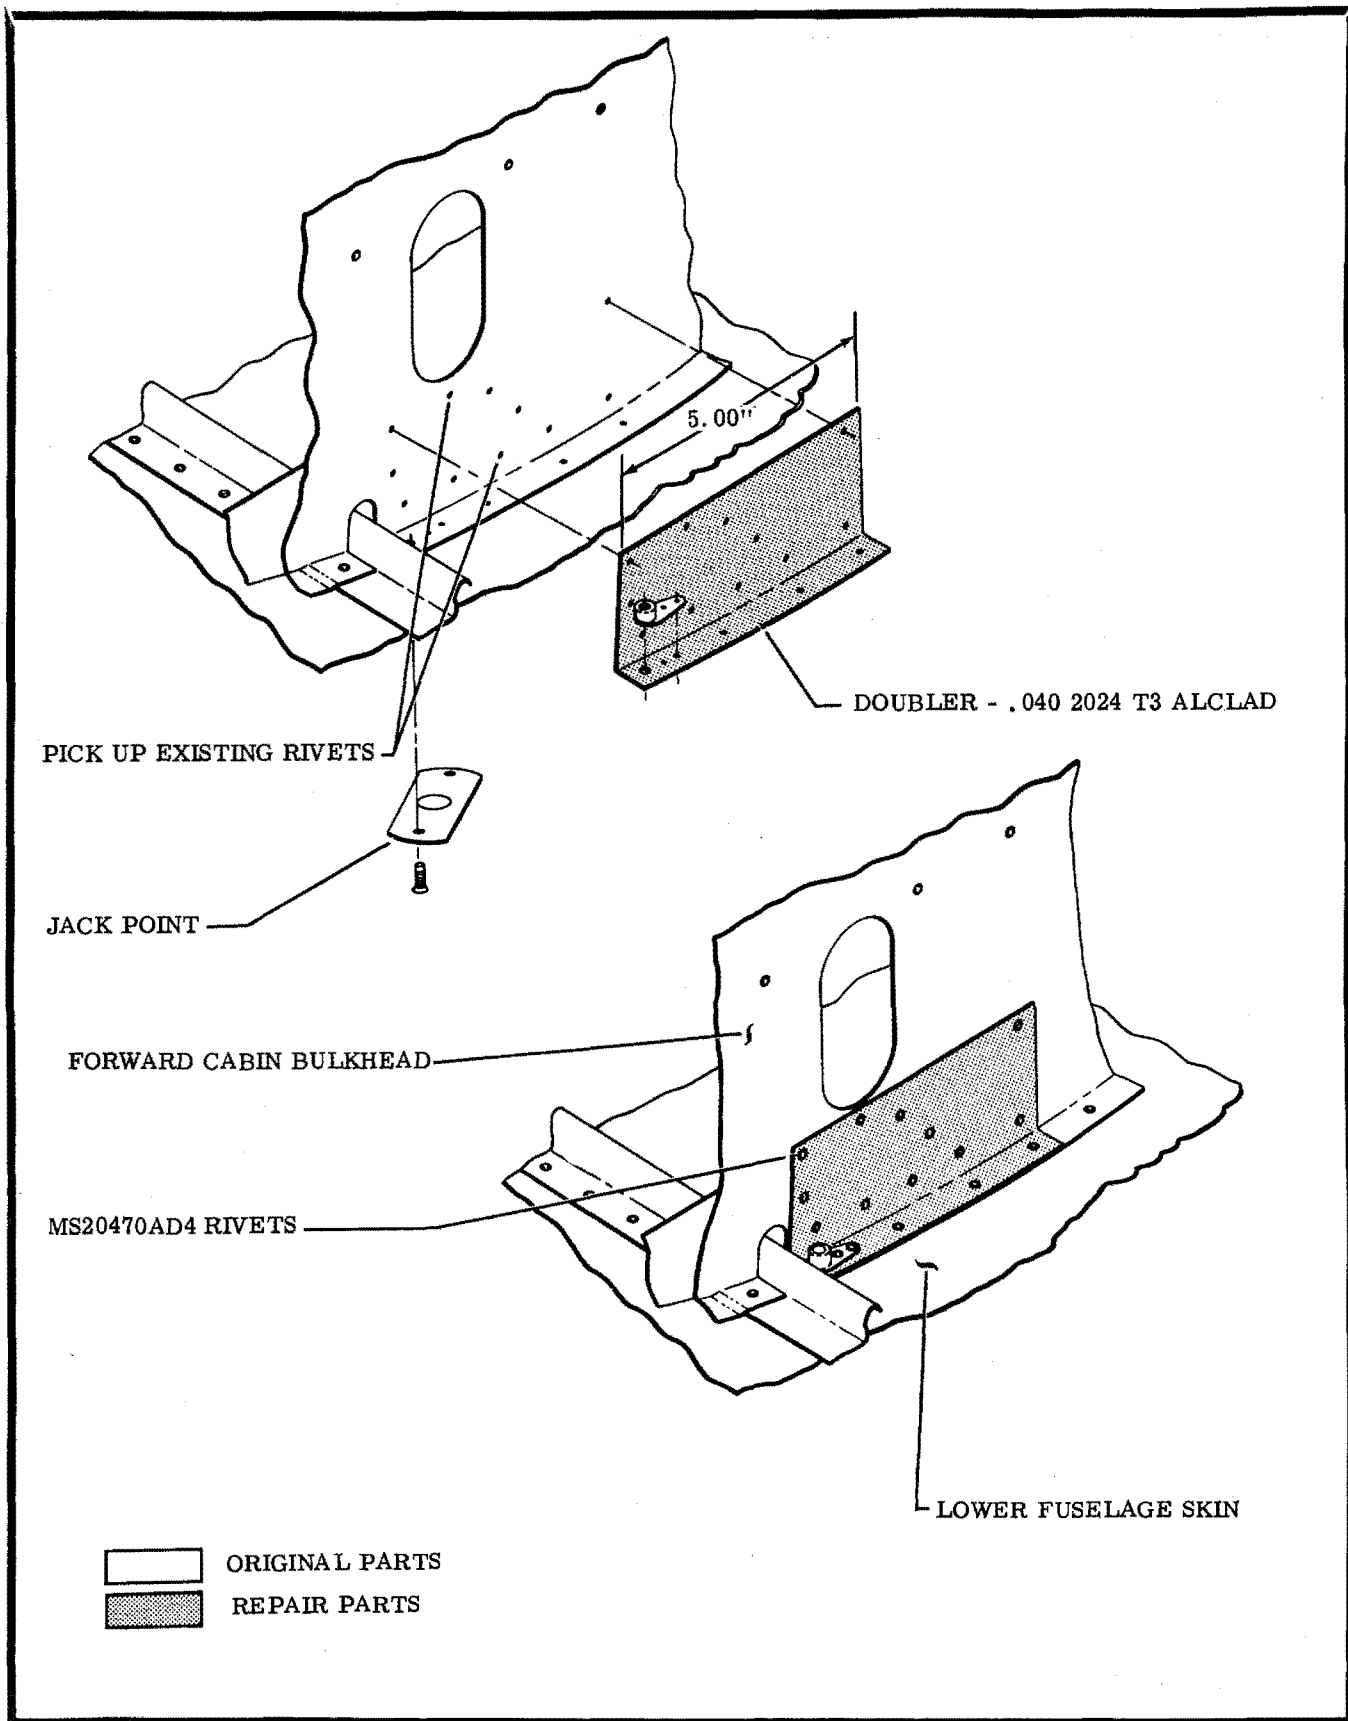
Typical Jacking Point Reinforcement (Sheet 2 of 2)
